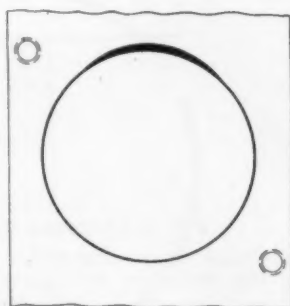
CYLINDER DEFECTS PRODUCED BY WEAR
